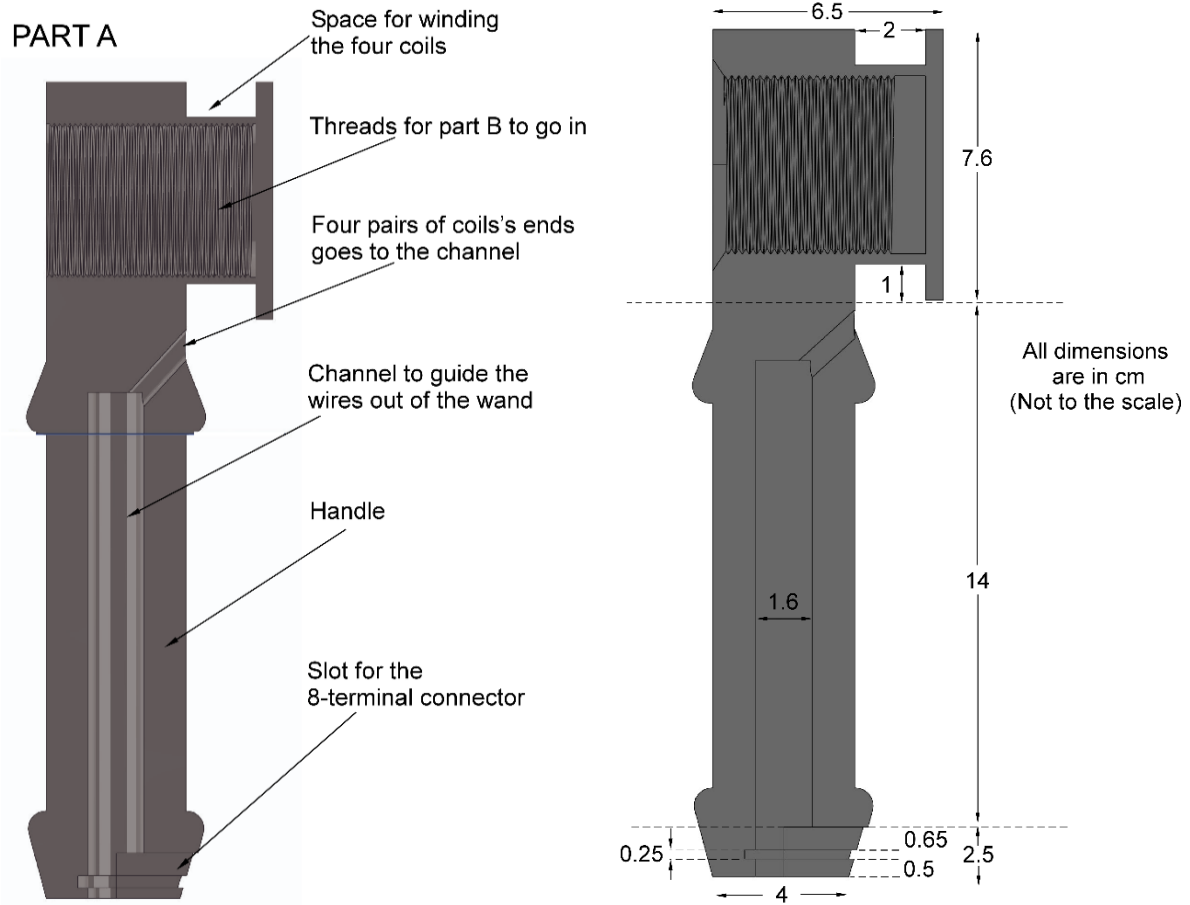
Detailed description of part A of the wand and the dimensions.
